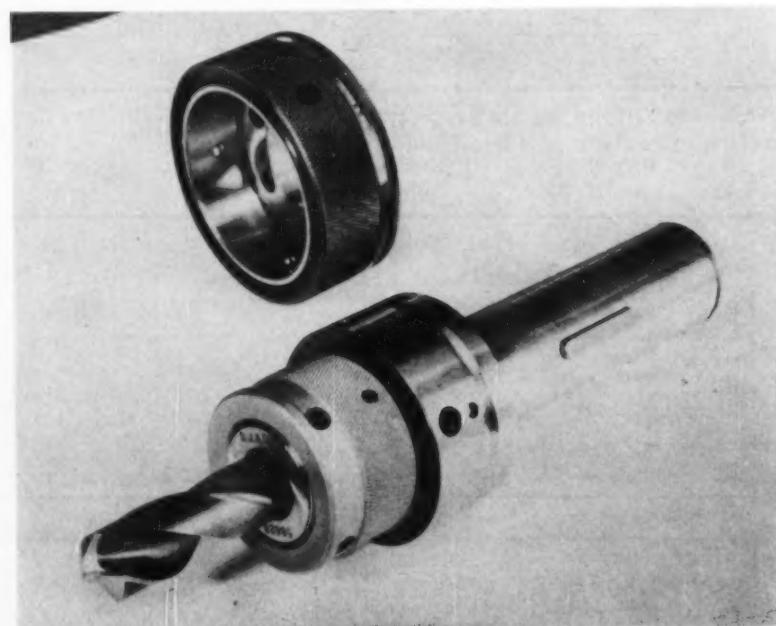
Shortest flute length in this test series boosted drill life 8000 pct over that obtained with a new drill projecting 2 1/8 in.
